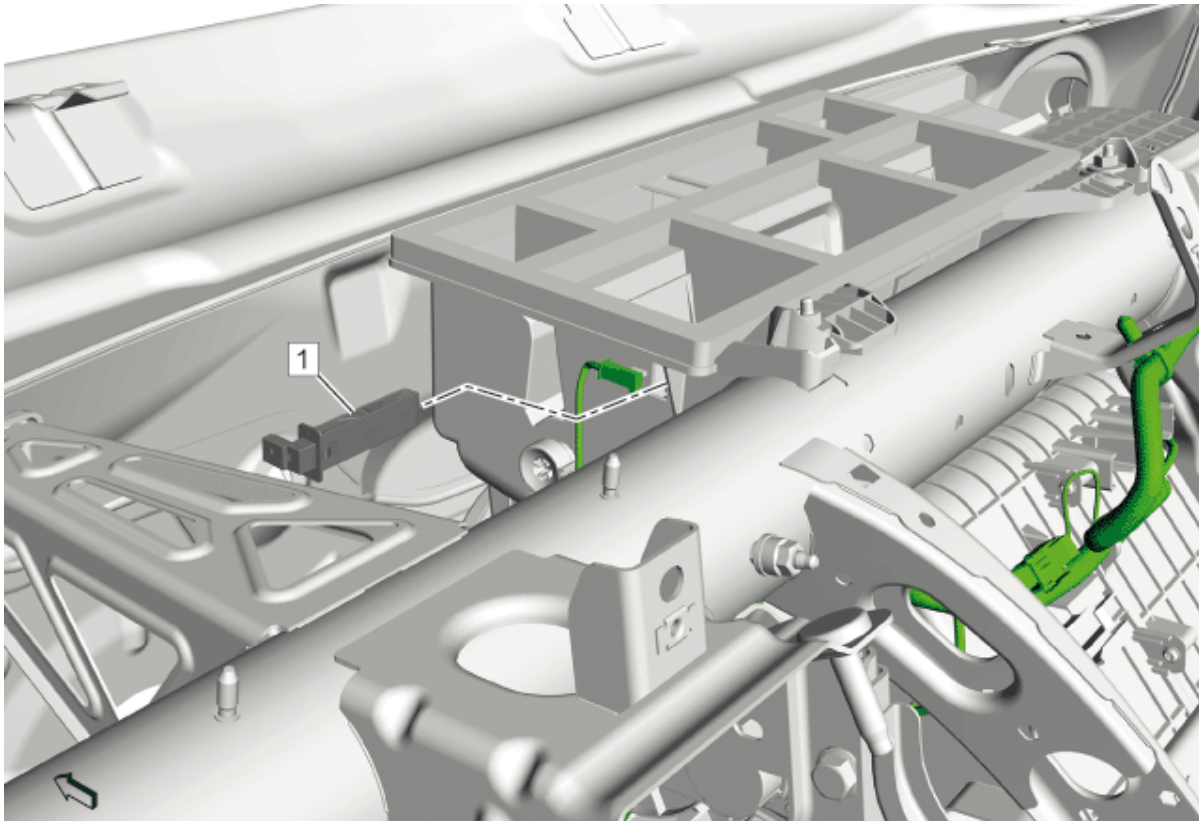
Inside Air Temperature Sensor - Left Side Upper
